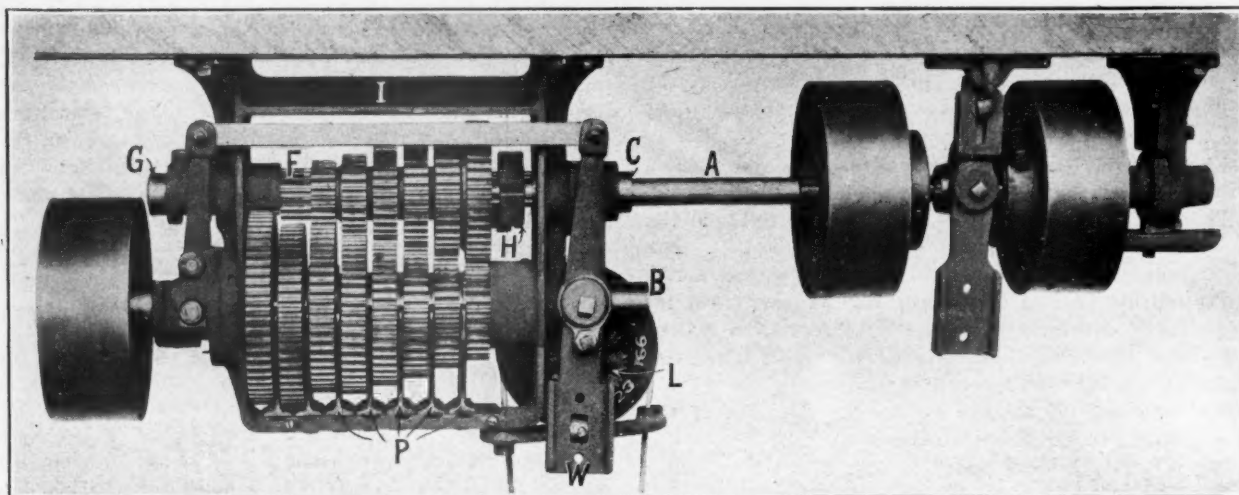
FRONT VIEW WITH COVERS REMOVED, SHOWING SHIPPER LEVER AND CONNECTING ROD TO SLOW-SPEED CLUTCH.
